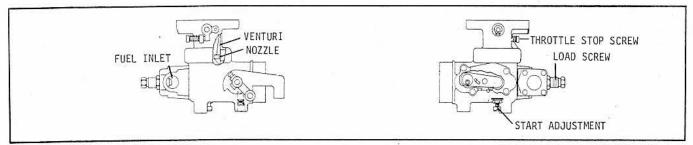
ADJUSTING MODEL CBM CARBURETOR
